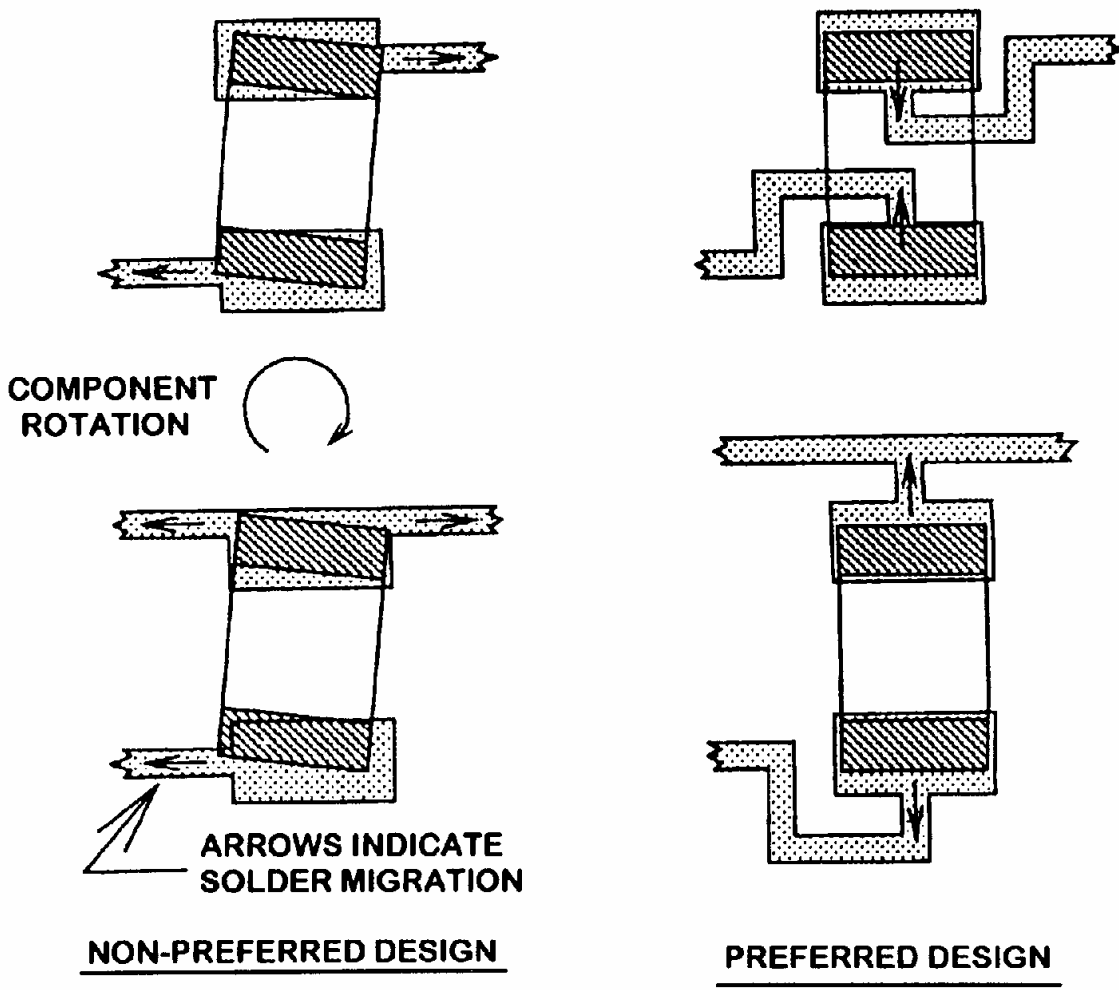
CONNECTING TRACES TO COMPONENT LANDS WHEN SOLDER MASK IS NOT USED
